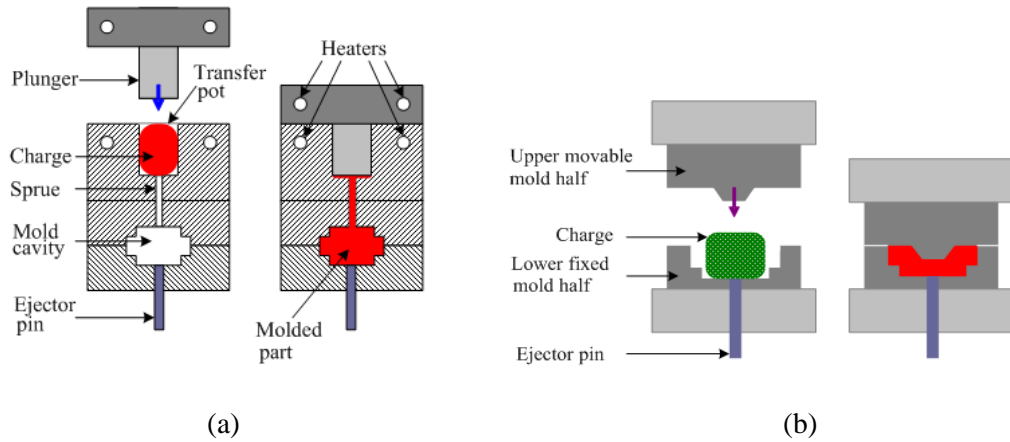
Schematics of epoxy molding processes [29]. (a) Injection molding. (b) Compression molding.
